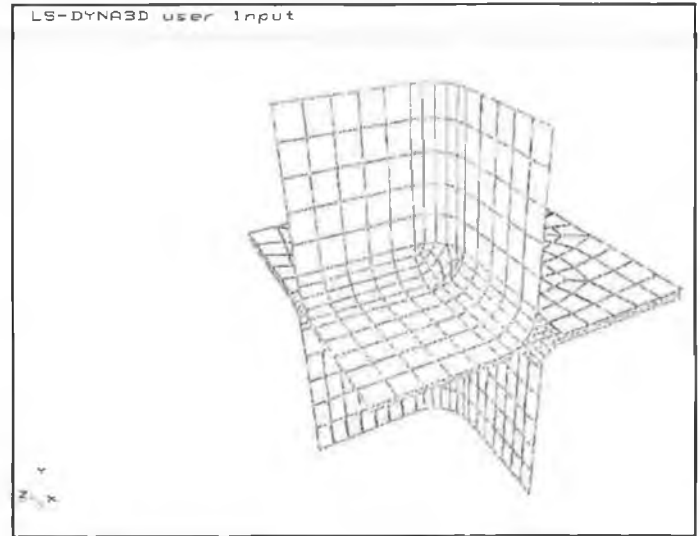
Box drawing Tool geometry : Dimensions in mm.
